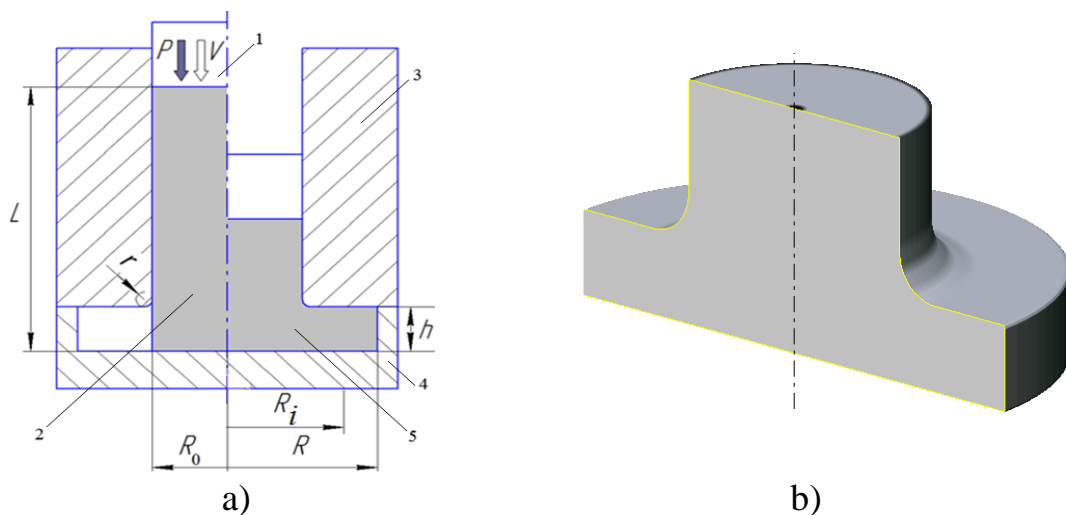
Die scheme of single-ended radial extrusion process (a) and final formed part (b); 1 – punch, 2 – billet, 3 – upper die, 4 – lower die 5 – final formed part
